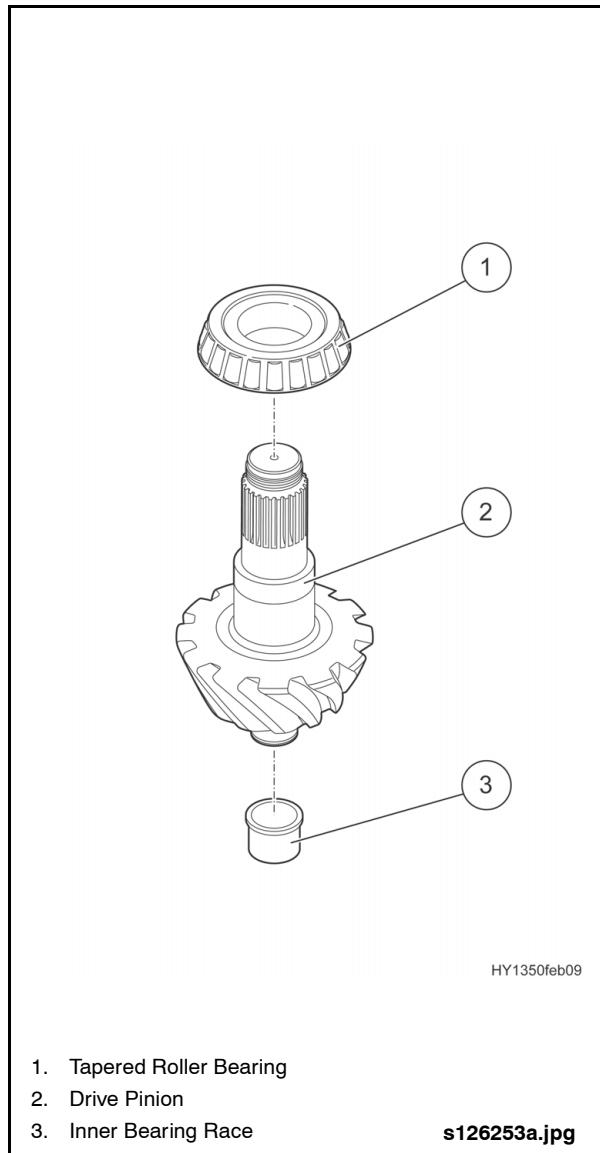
Mounting Inner Tapered Roller Bearing & Inner Race
